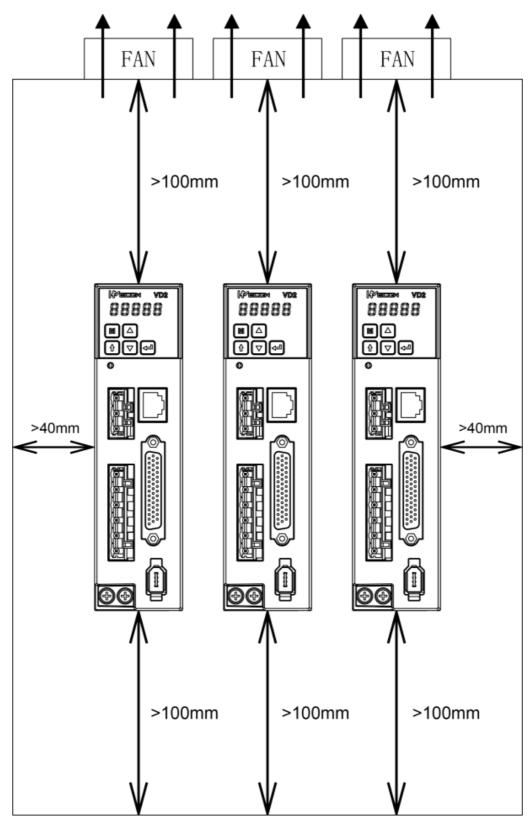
Parallel installation dimensions of multiple VD2A drives
